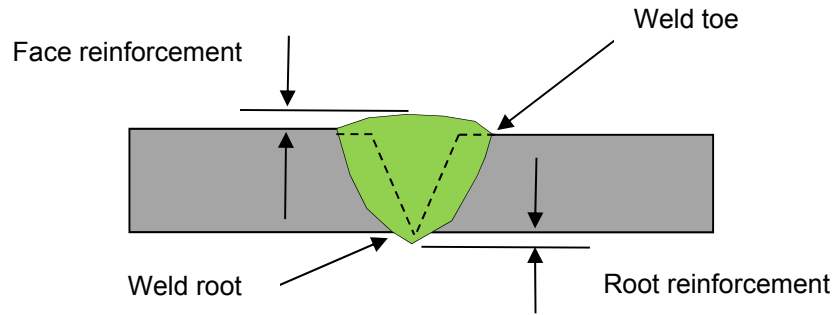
Groove weld geometry and nomenclature (ref. 1).
